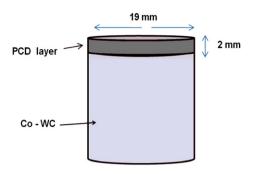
A diagram of a typical cylindrical tool-bit showing the dimensions of the PCD layer.
